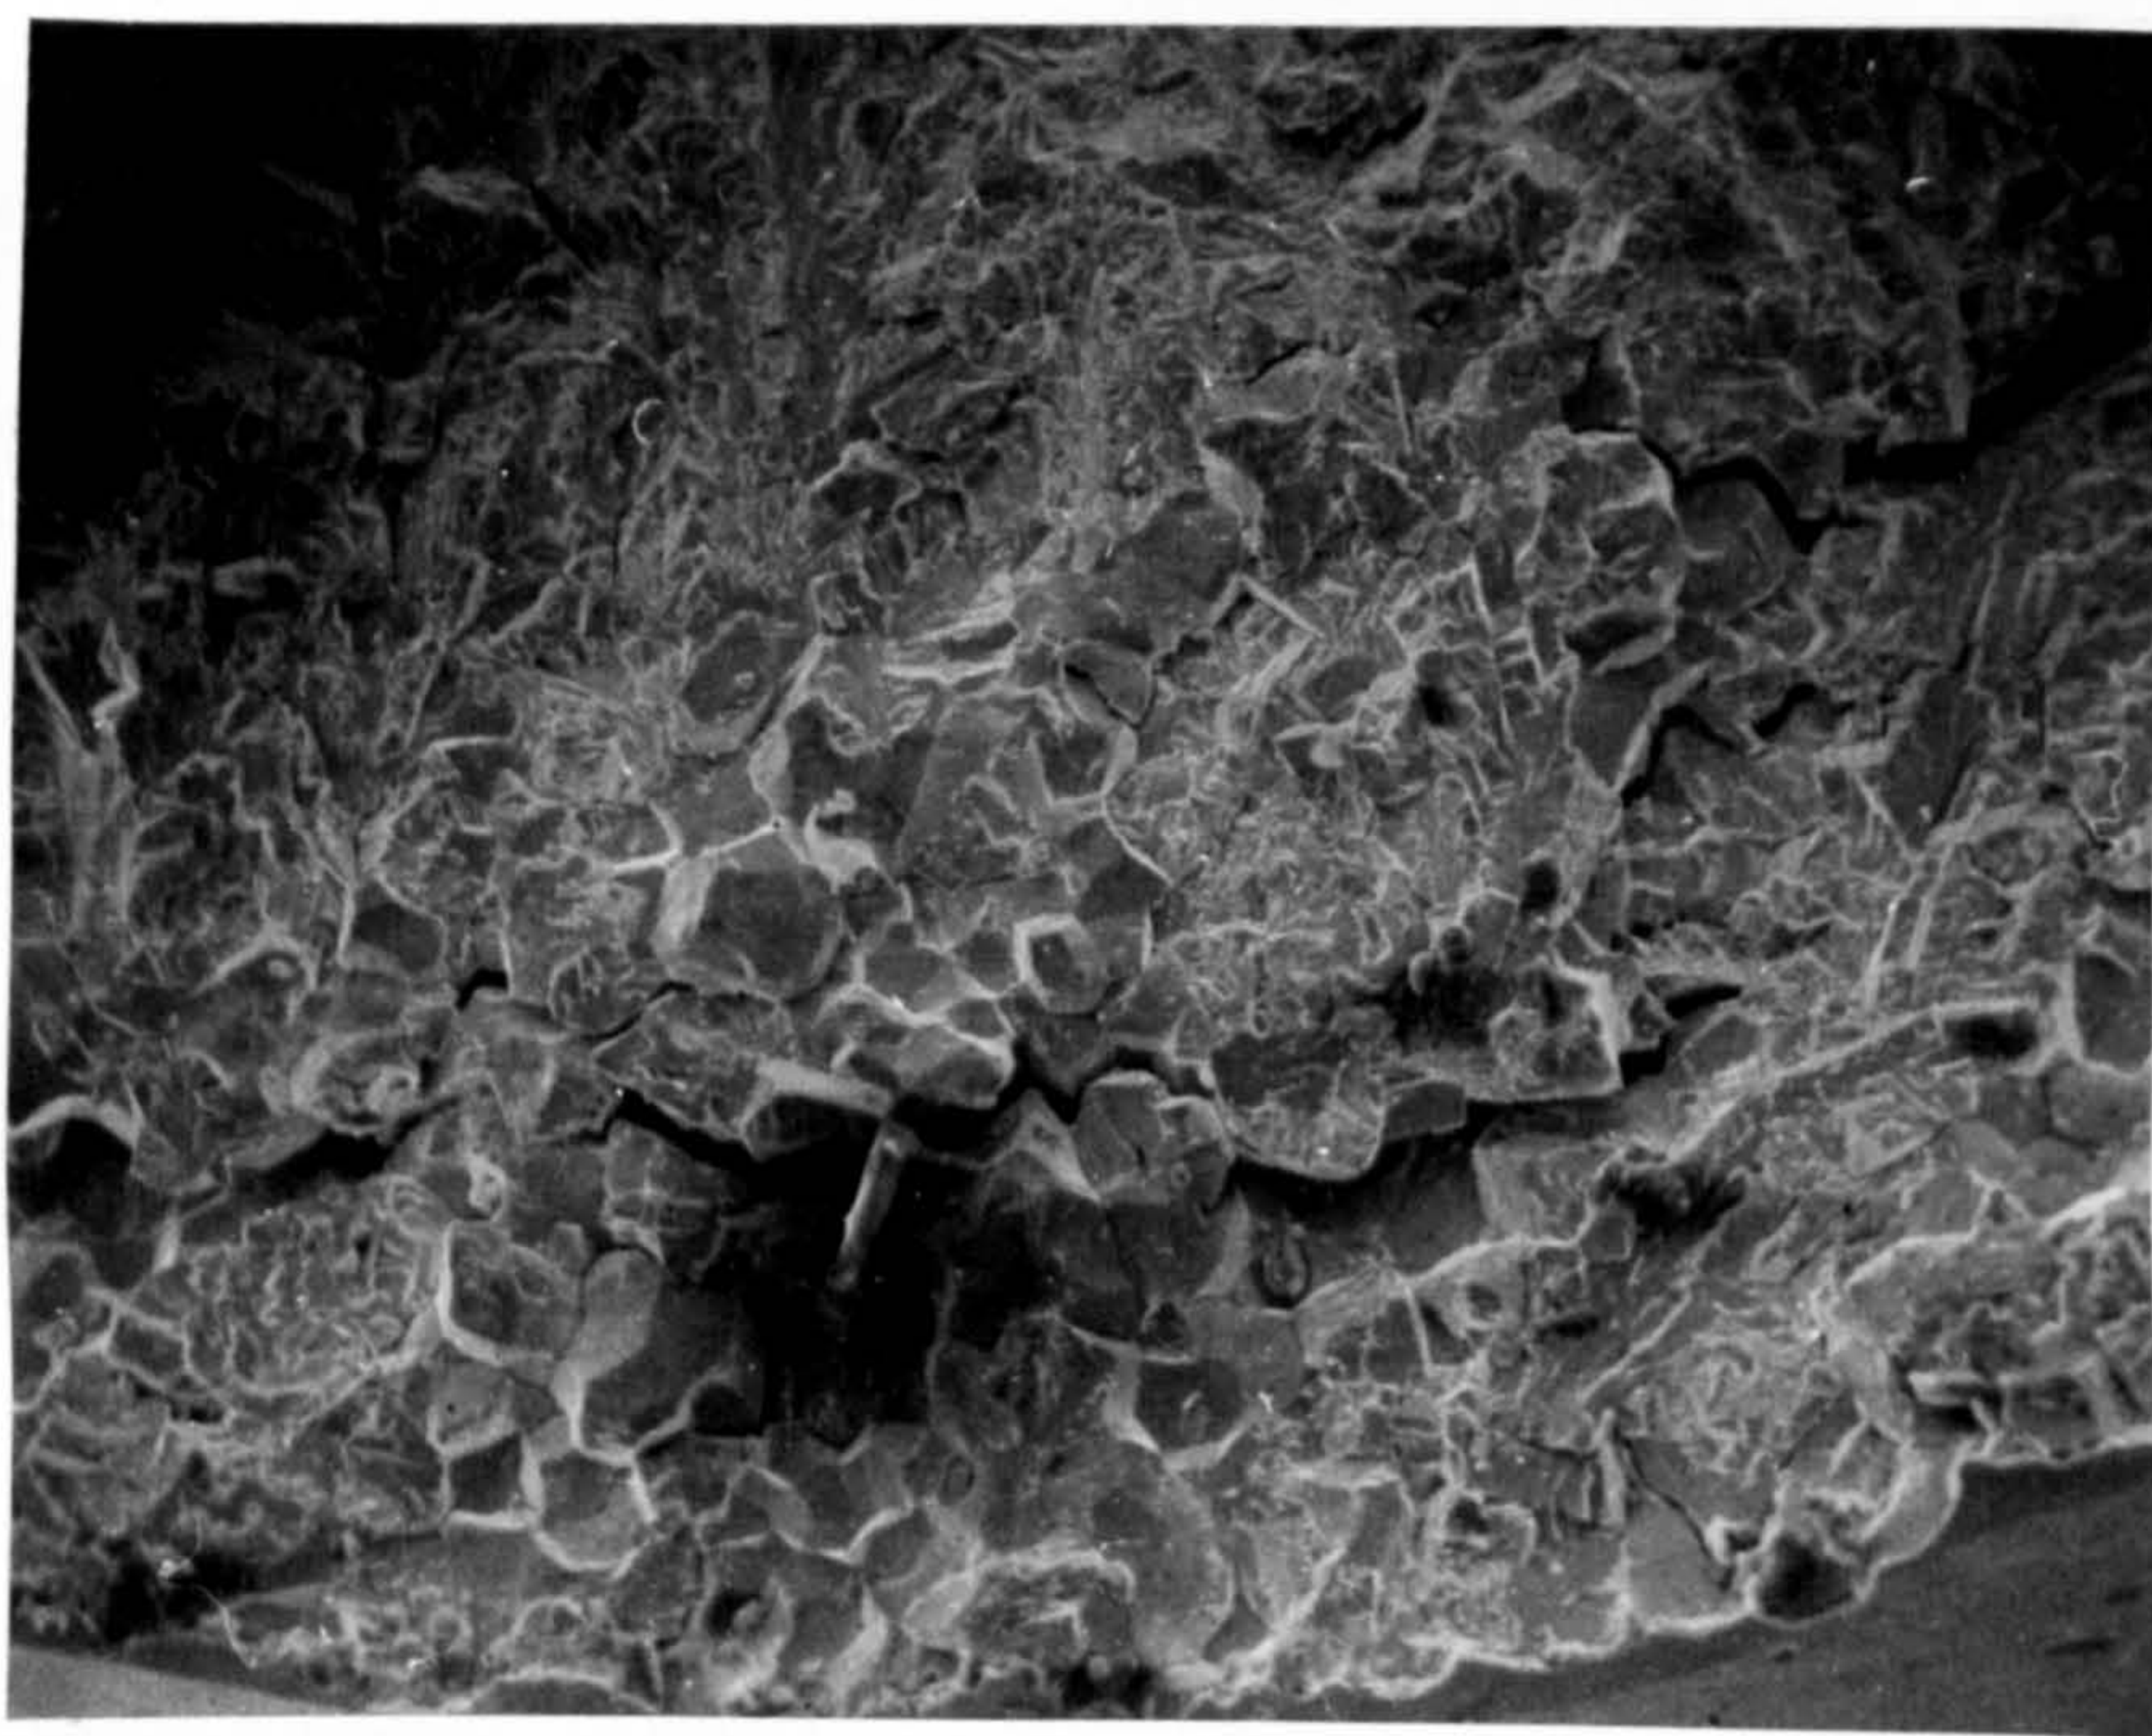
Fracture surface showing intergranular and transgranular cracked areas (125x)
